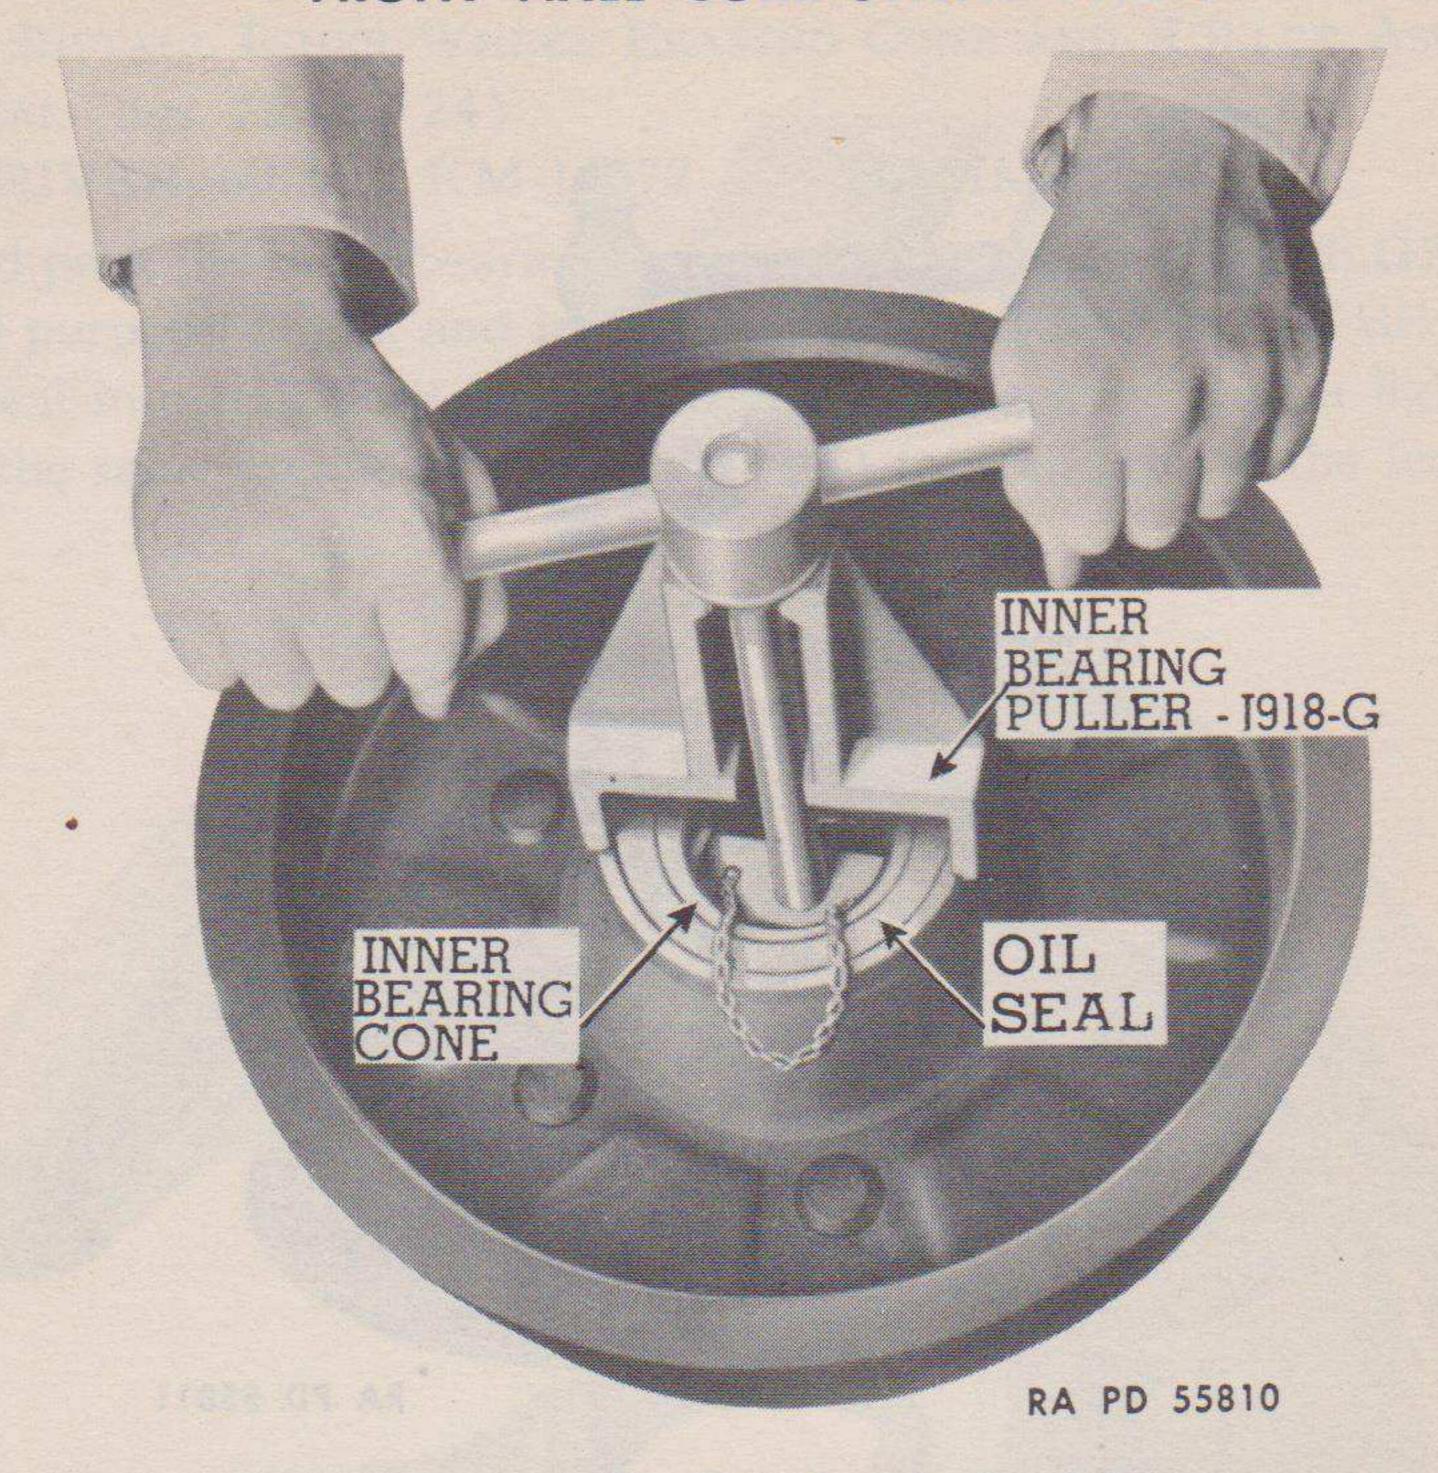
Removing Wheel Inner Bearing and Oil Seal
